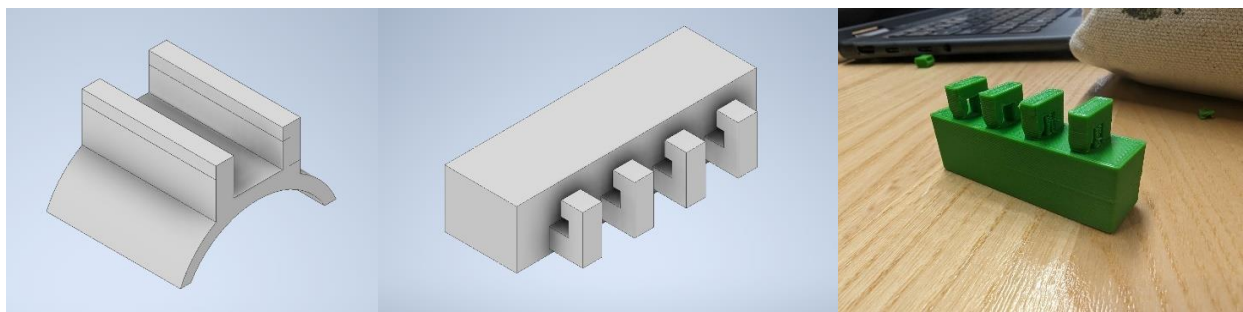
, Figure 19, Figure 20: The updated design for the linear actuator housing, first prototype of actuator adapter, and the printed prototype of this adapter.
